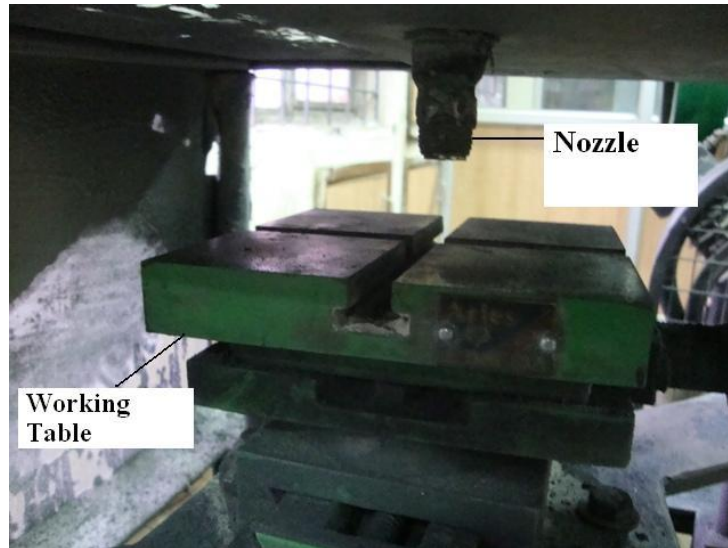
The working table and Nozzle of Abrasive Jet Machine, Metal forming lab Department Of Mechanical Engg. DTU
